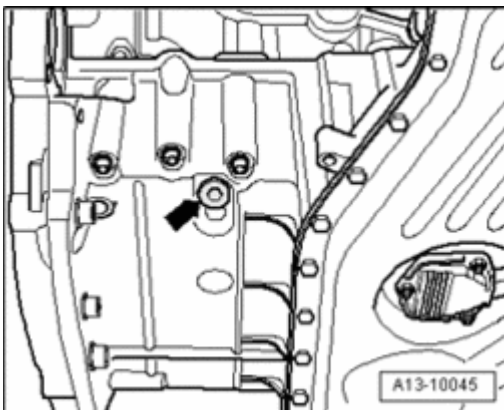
Identifying Locking Bolt Of Upper Part Of Oil Pan
